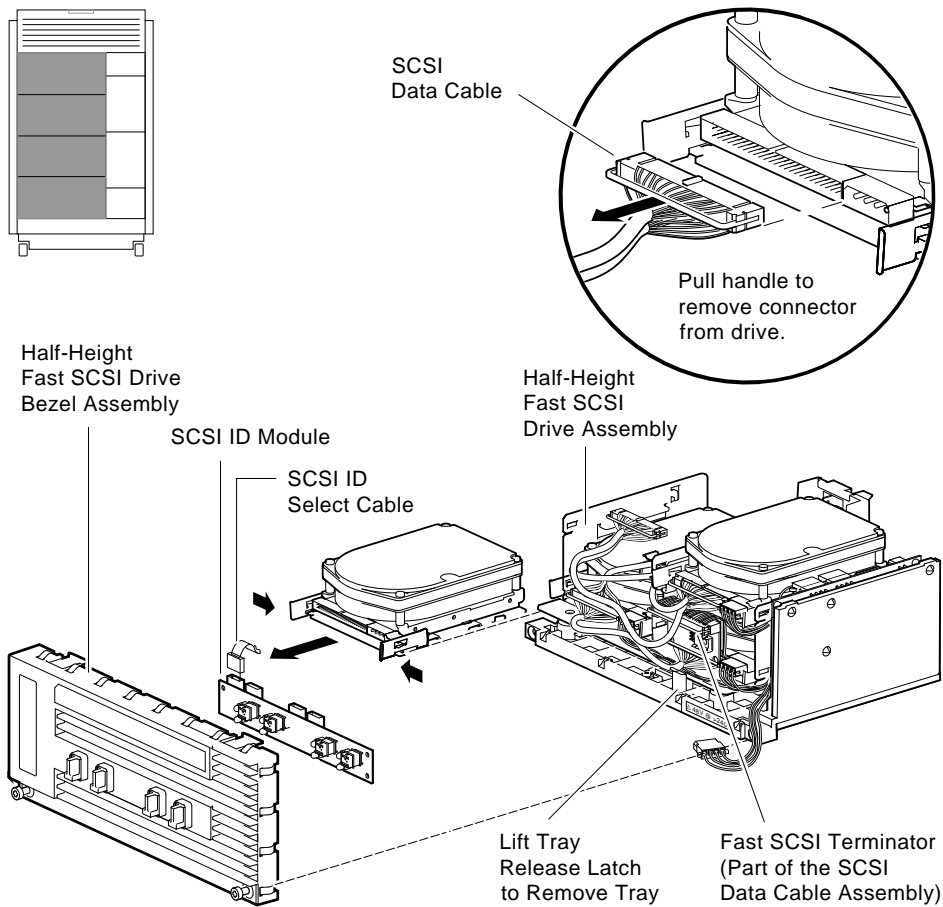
RZ-Series 3 1/2-Inch Storage Assembly
